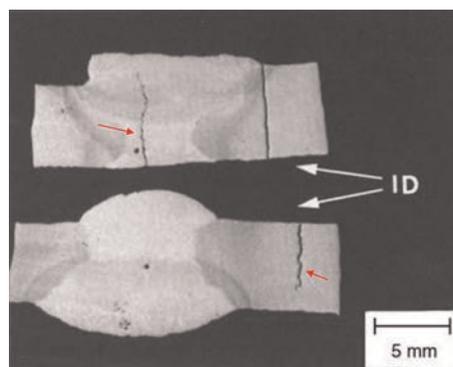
View of metallographic cross sections of pipe-to-elbow welds showing stress-corrosion cracks (red arrows) originating from the inside surface of the weld metal and the base metal. ID, inside diameter
